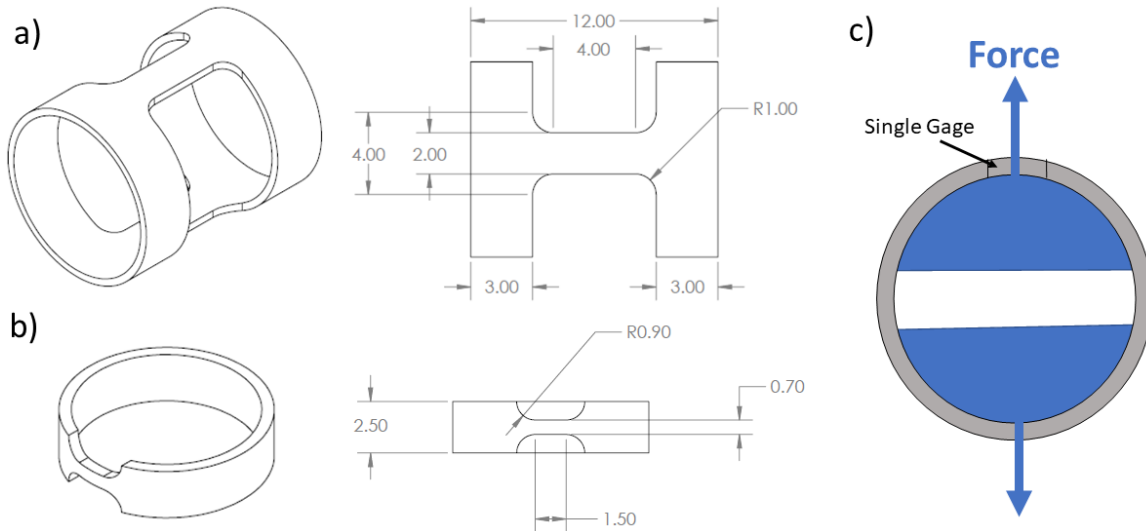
Specimen drawings of a) the ATT specimen and b) RTT specimen used in this work with c) a schematic showing the load configuration of the fixture used to load RTT specimens.
